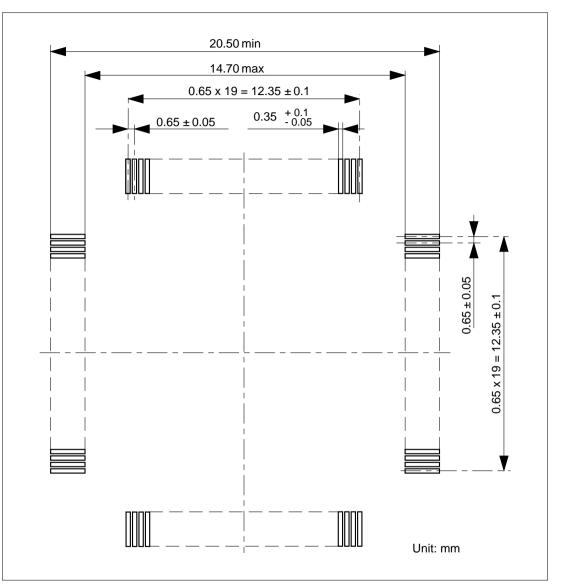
Recommended Mount Pad Dimensions of the User System IC Socket
